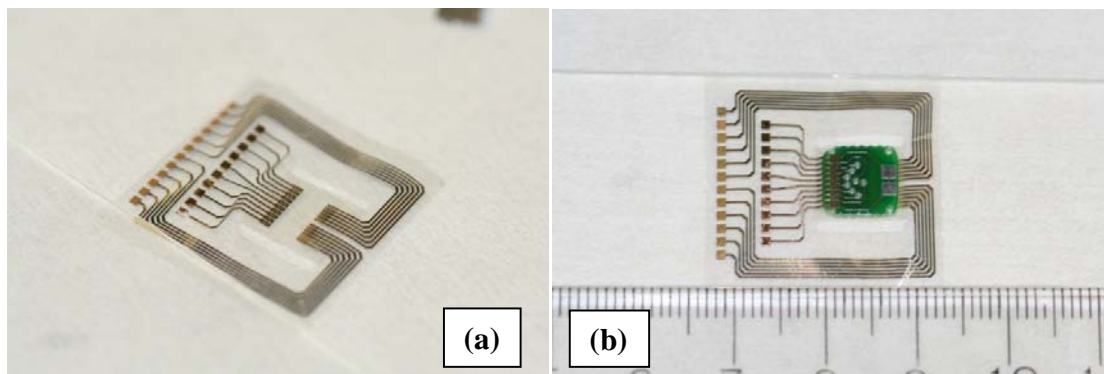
(a) Fabricated dual layer parylene pocket device for PCB integration; (b) PCB inserted into the pocket. The insertion process is similar to the process described in previous sections.
